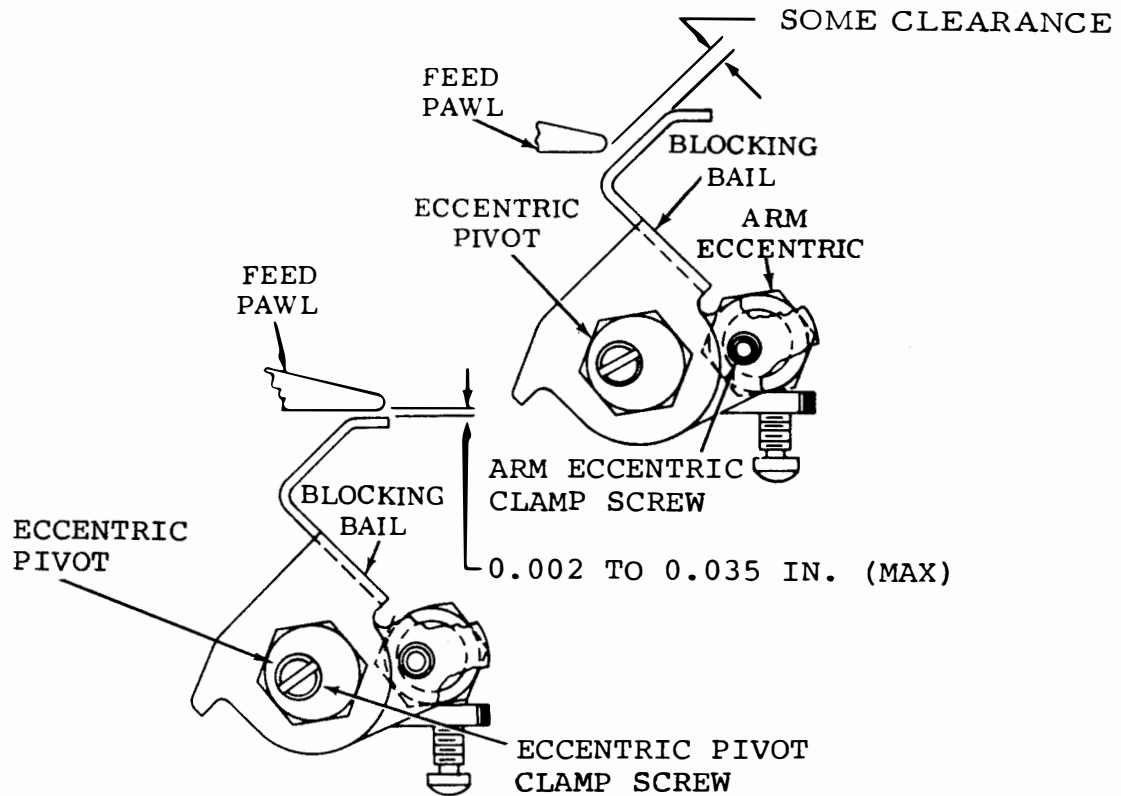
Blocking Bail Arm Eccentric and Blocking Bail Eccentric Pivot, Front View
